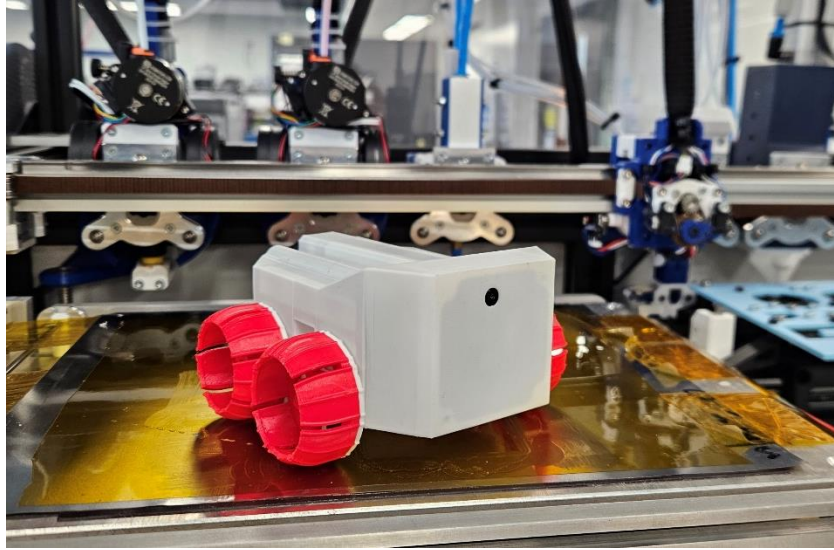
Final pipe inspection robot on the platforms print bed, after fully automated manufacture.
